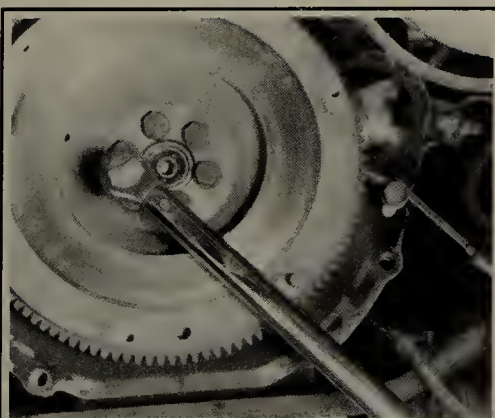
If necessary, lock the flywheel in place and remove the retaining bolts . . .
